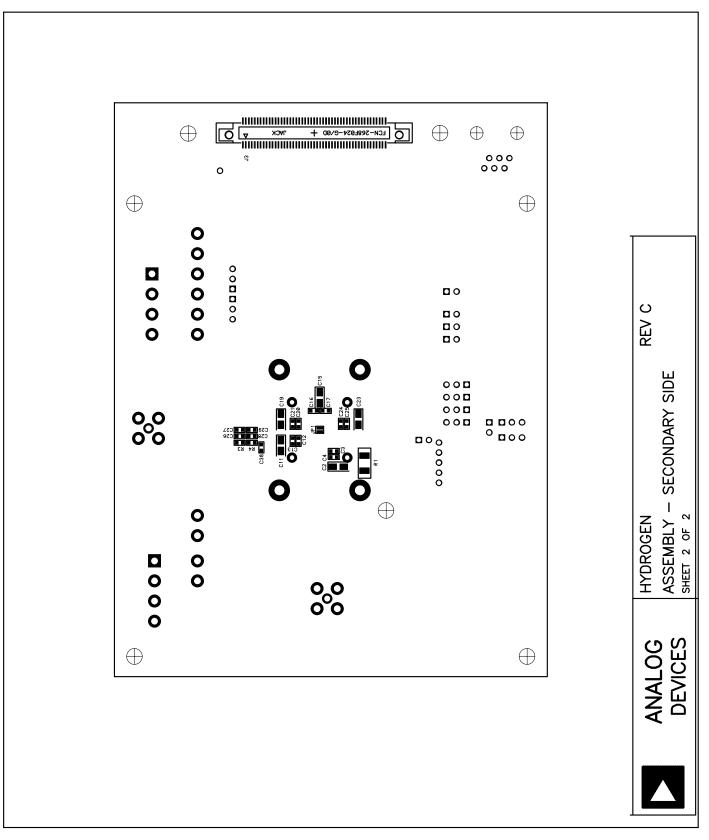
PCB Layout Bottom Placement, AD9736 Evaluation Board, Rev C
